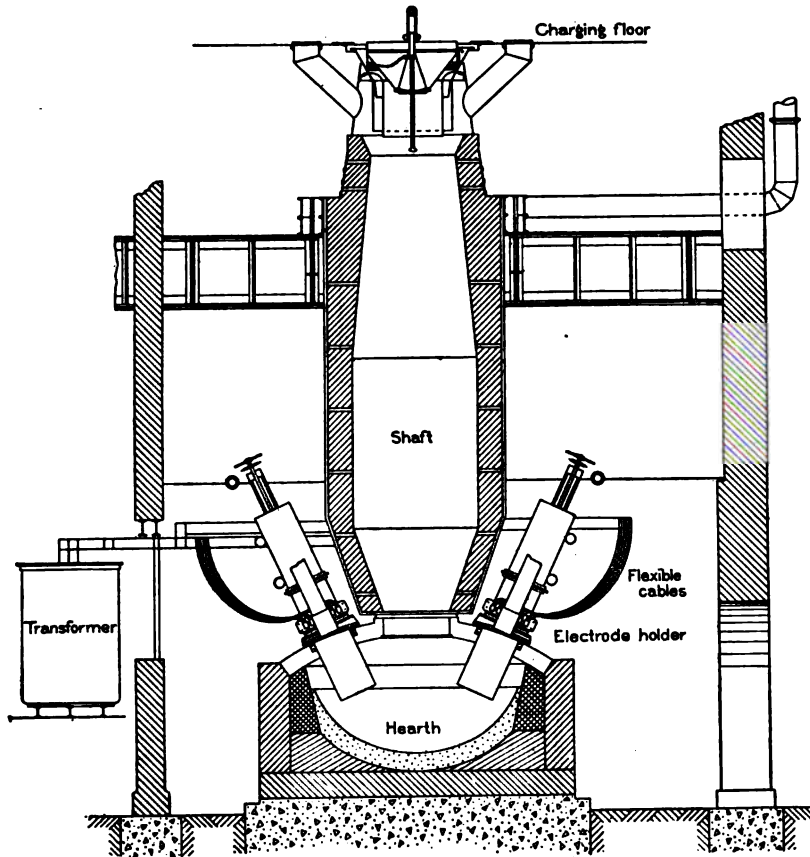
Sectional elevation of furnace at Trollhättan.
